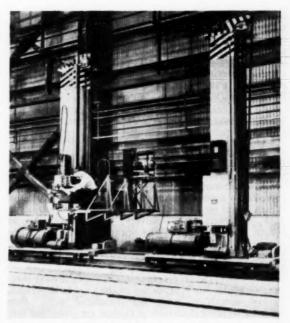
Automatic shielded twin-arc welding machines
